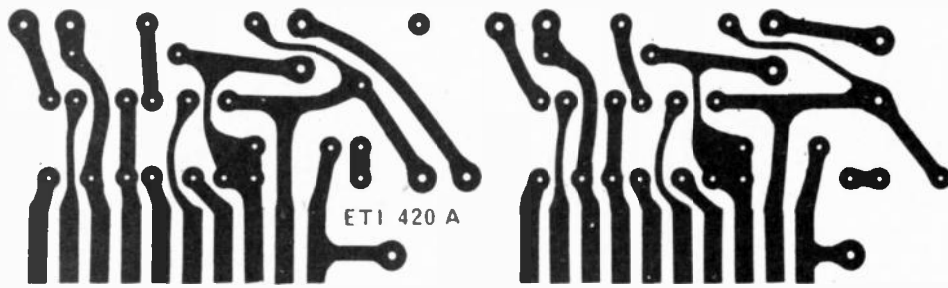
Printed circuit board for the twin power amplifier assembly.
